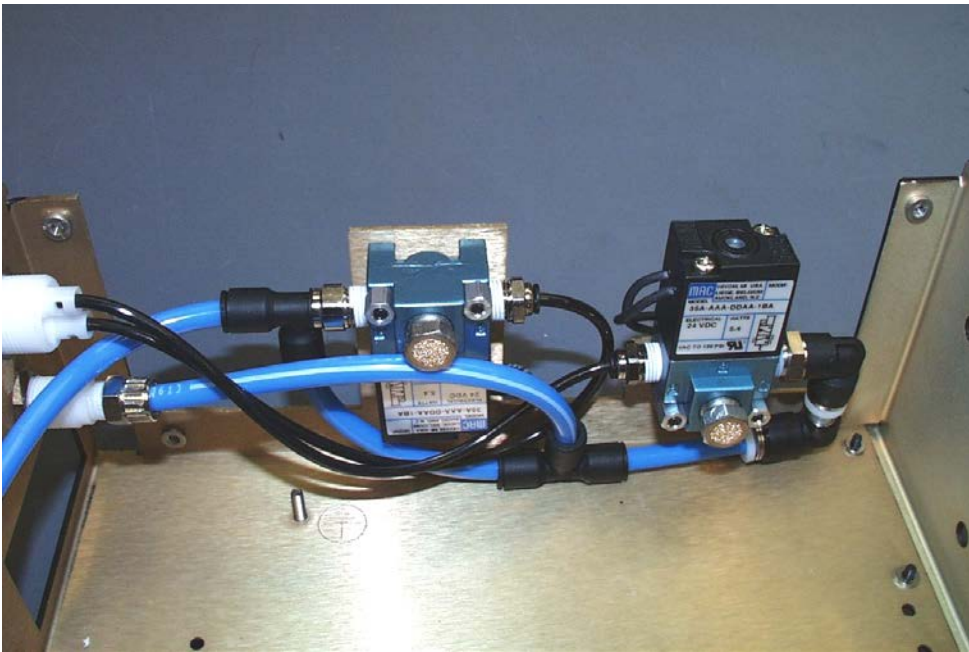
Shuttle (left) and Cartridge valve (right) tube routing
